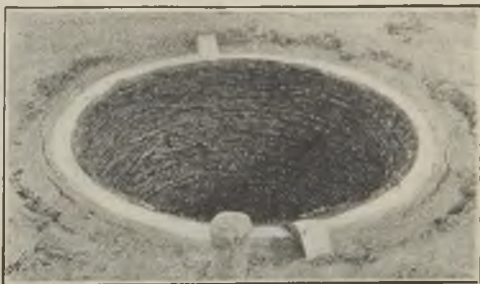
THE CASTING PHOTOGRAPHED AFTER THE WITHDRAWAL OF THE CORE.
